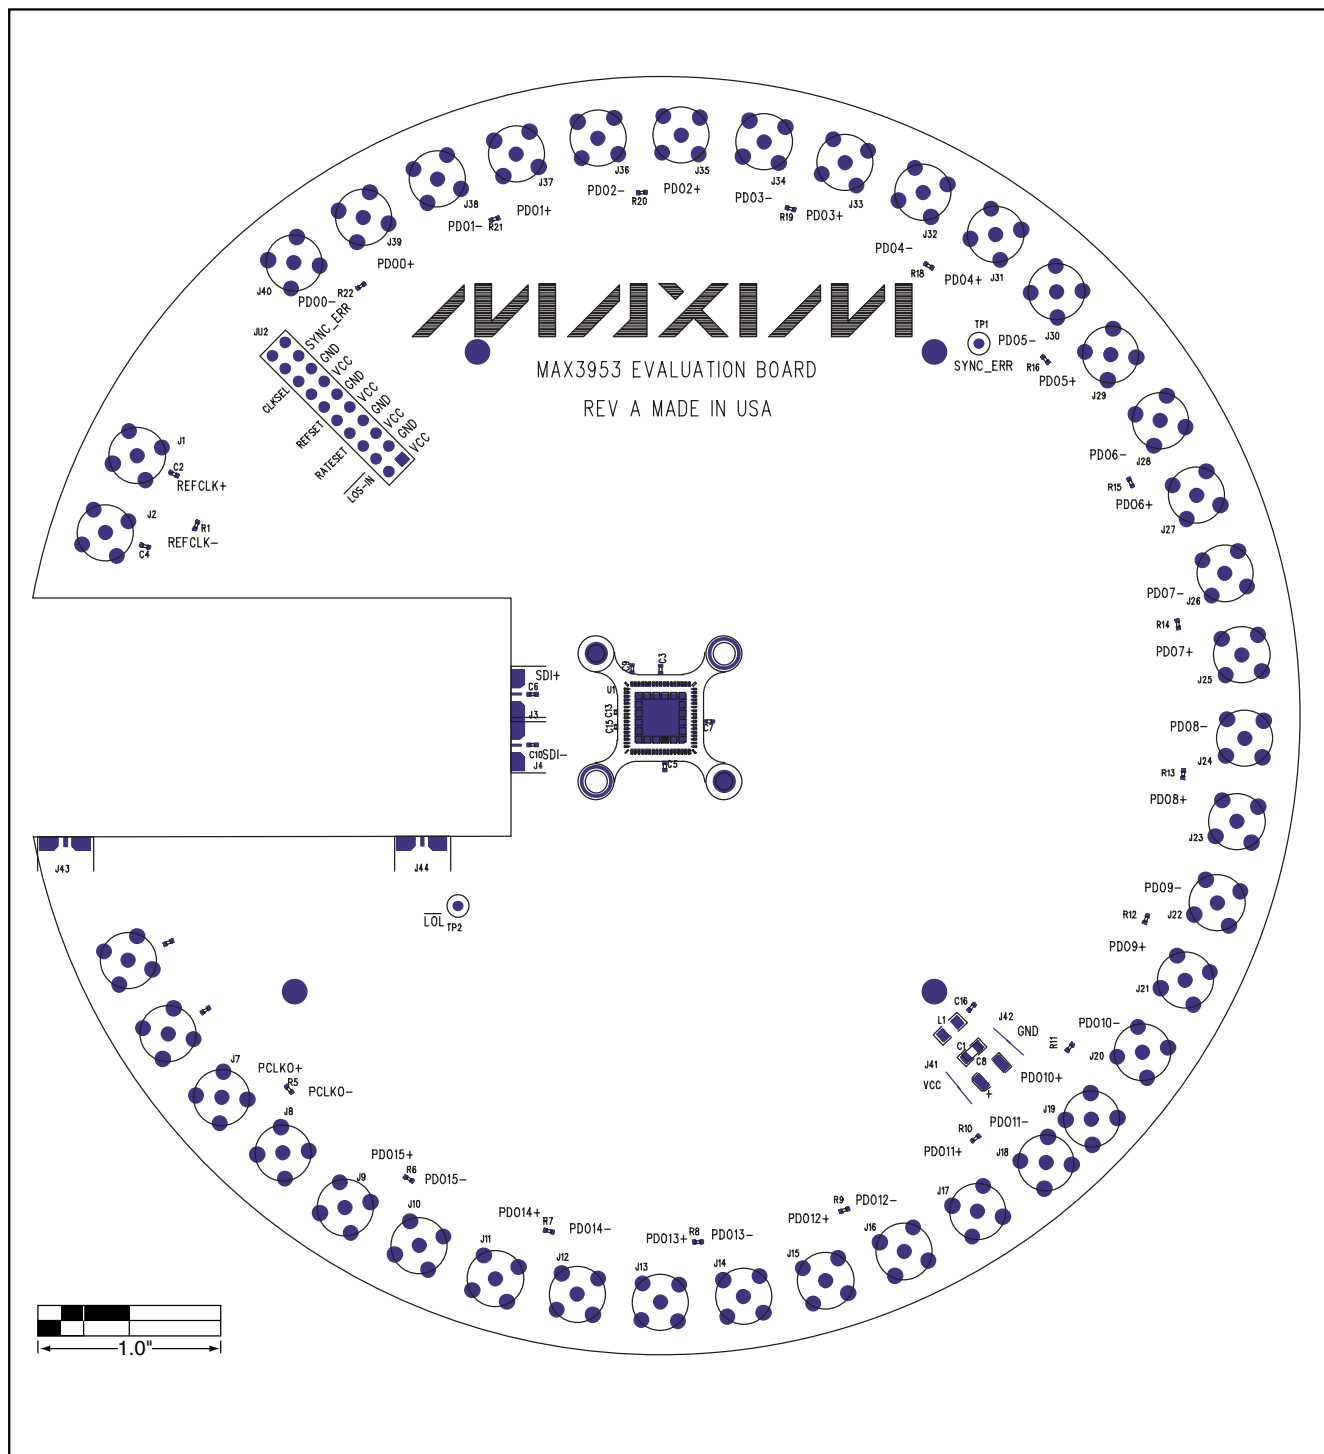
MAX3953 EV Kit Component Placement Guide—Component Side
